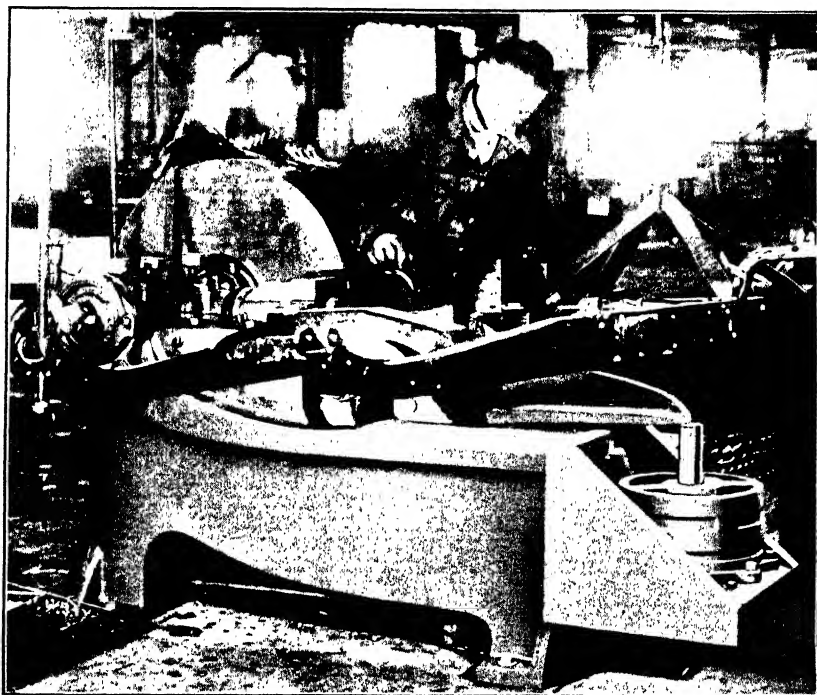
A power press equipped with (Marquette) pneumatic pressure equalizer, riveting automobile frames.
